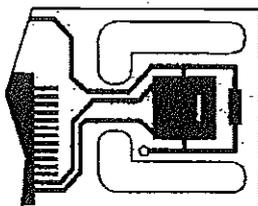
Top view of example of mounted SHT2x with slits milled into PCB to minimize heat transfer.
